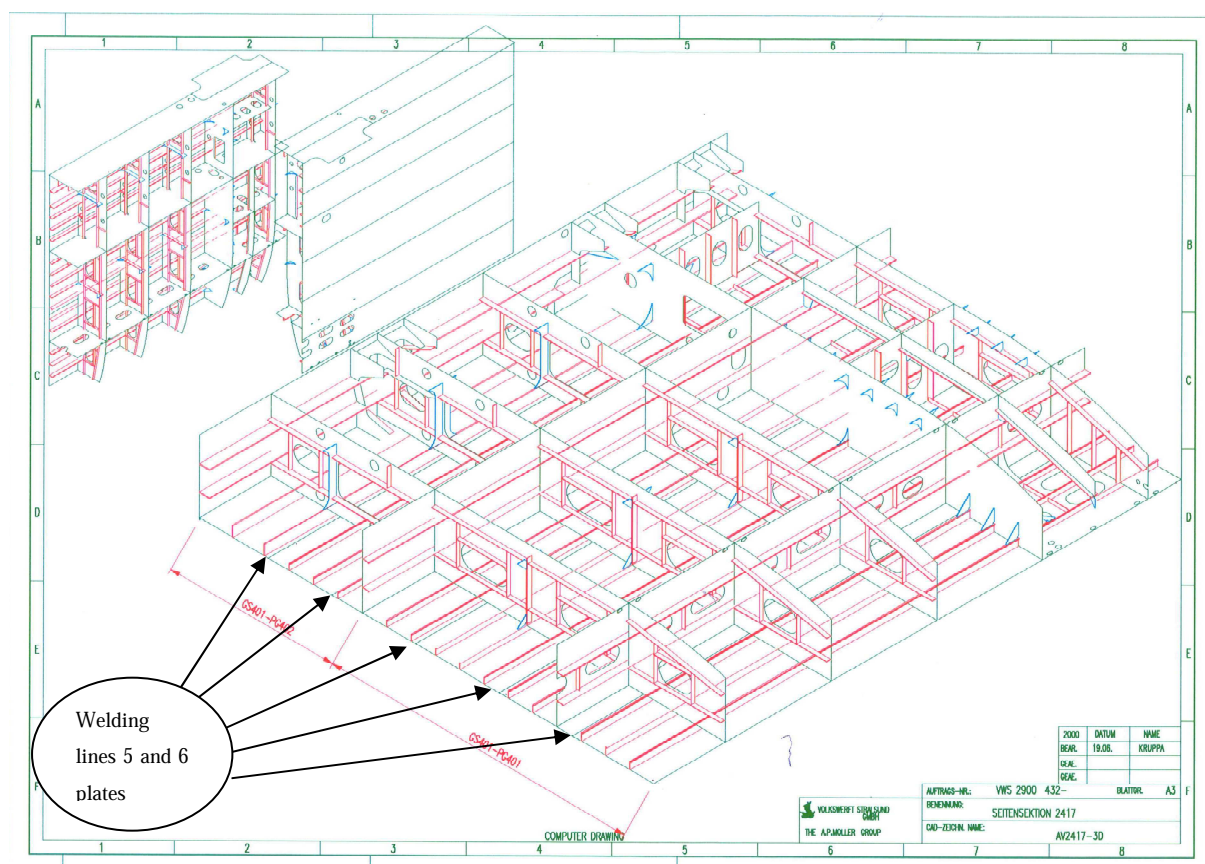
The detailed drawings of the tanker ship for section AV 2417
